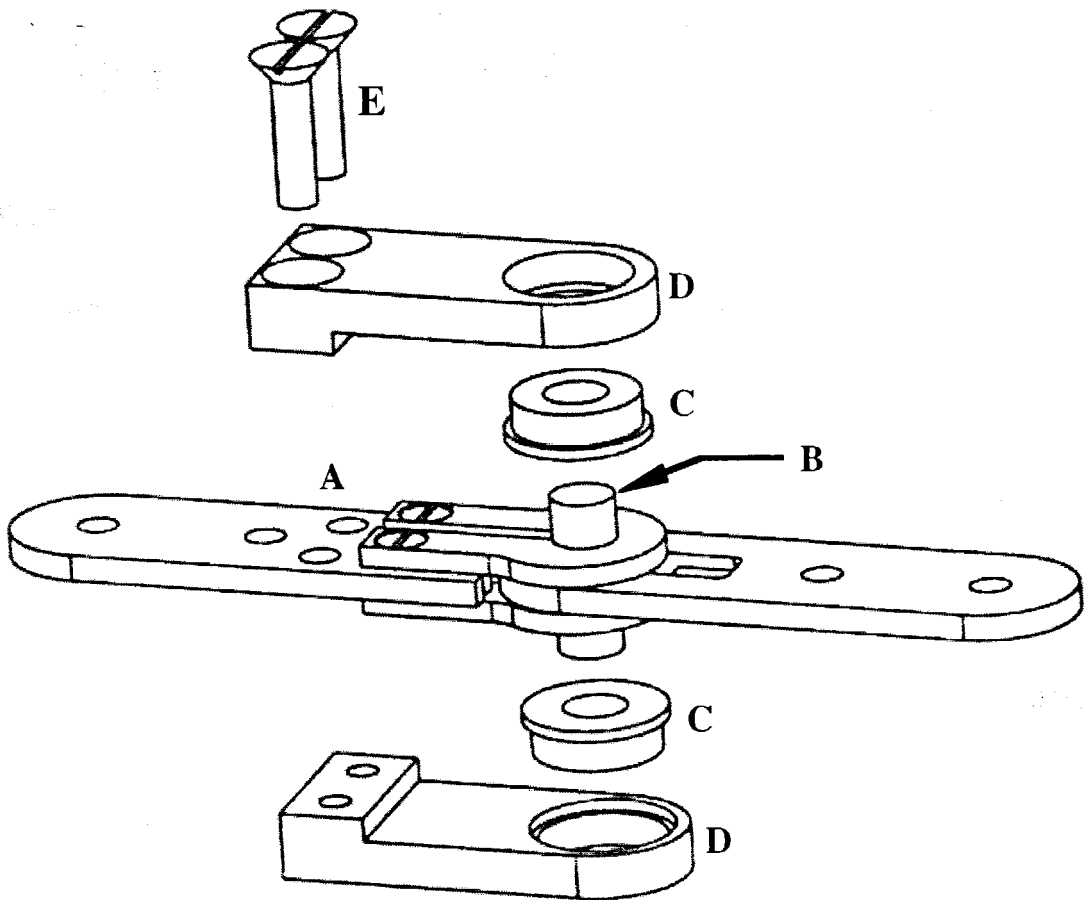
The reinforced HallJoint. The standard HallJoint (A) has a lengthened shaft (B) to be inserted into the bearings (C). The bearings reside in a reinforcing clamp (D) that fits around the HallJoint. Screws (E) hold the clamp together.
